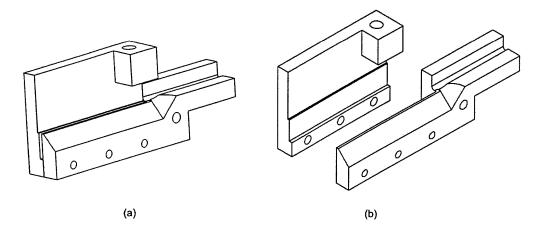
The bowl feeder orienting attachment assembly. The The pins are fed from the far right to the front left. The hole near the top accepts a pneumatic fitting. (a) completed assembly (b) the exploded view
